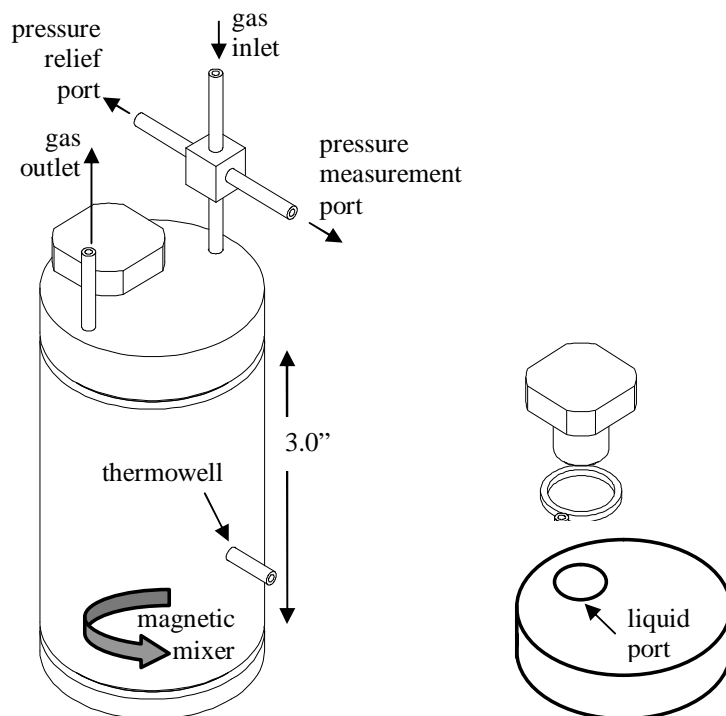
Schematics of the batch testing device: left picture shows the welded device and provides some functional details; right picture shows an exploded view of the liquid port and sealing cap.
